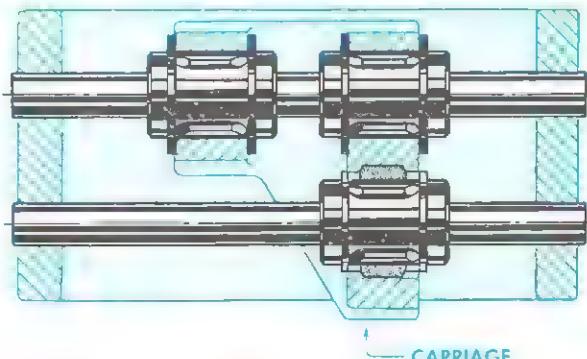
Parallel Shafts with a Resilient Mounted Ball Bushing
